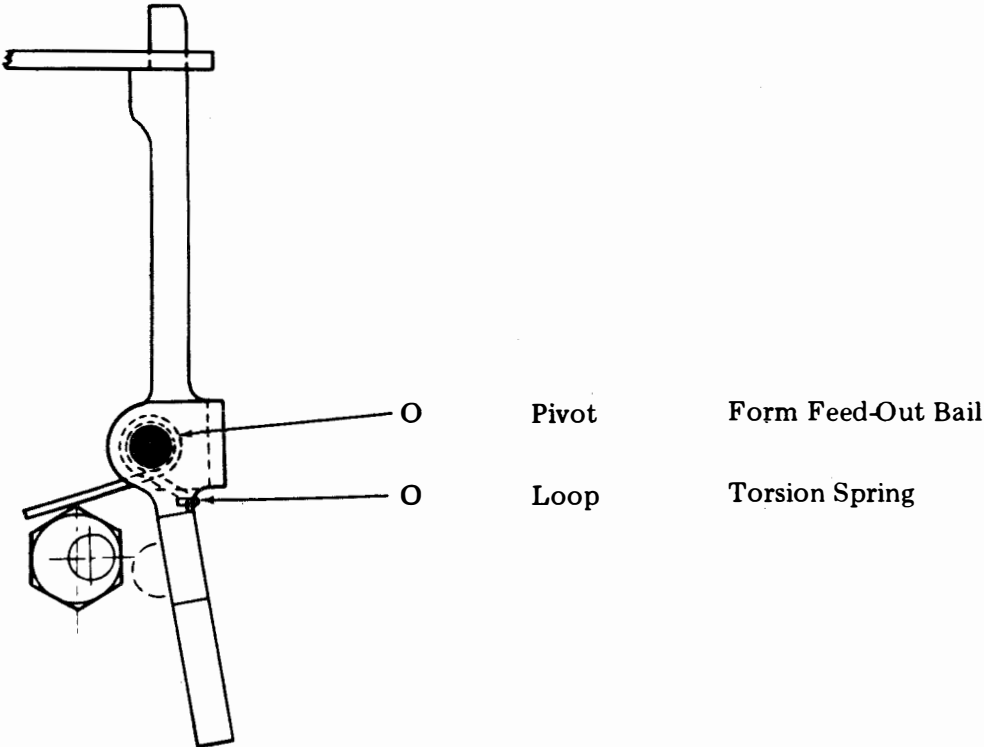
Form Feed-Out Mechanism, Right Rear View
